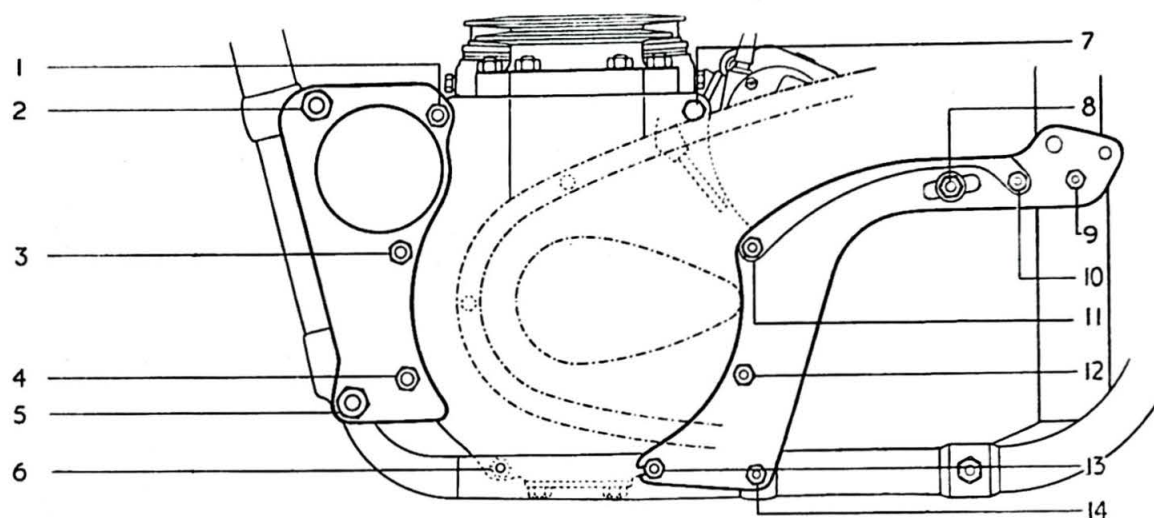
ENGINE PLATE—STUDS, BOLTS, NUTS AND WASHERS
